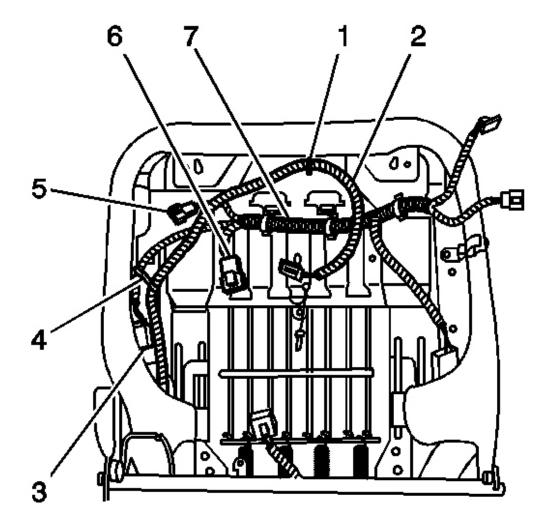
Identifying Connectors & Harness Courtesy of GENERAL MOTORS CORP.
